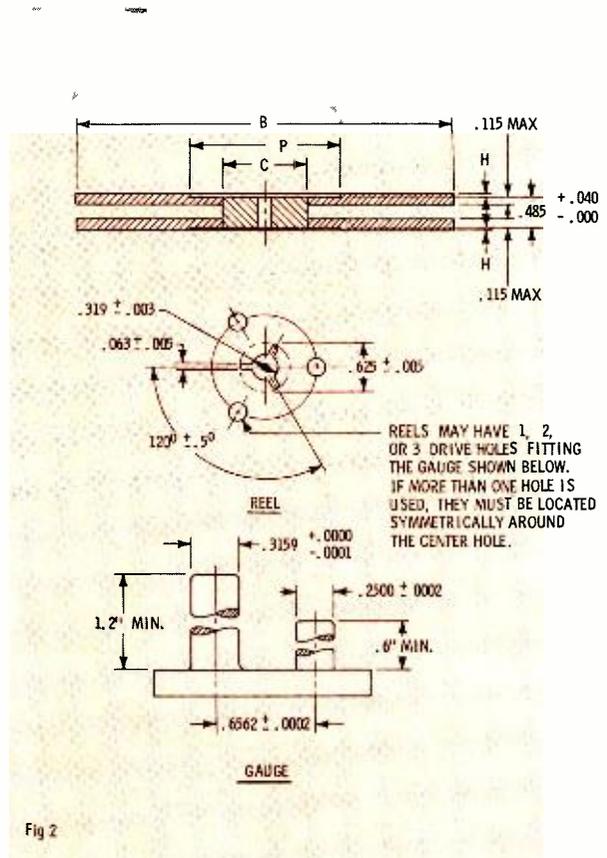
Dimensions specified in Standard for NAB Type B reels.
